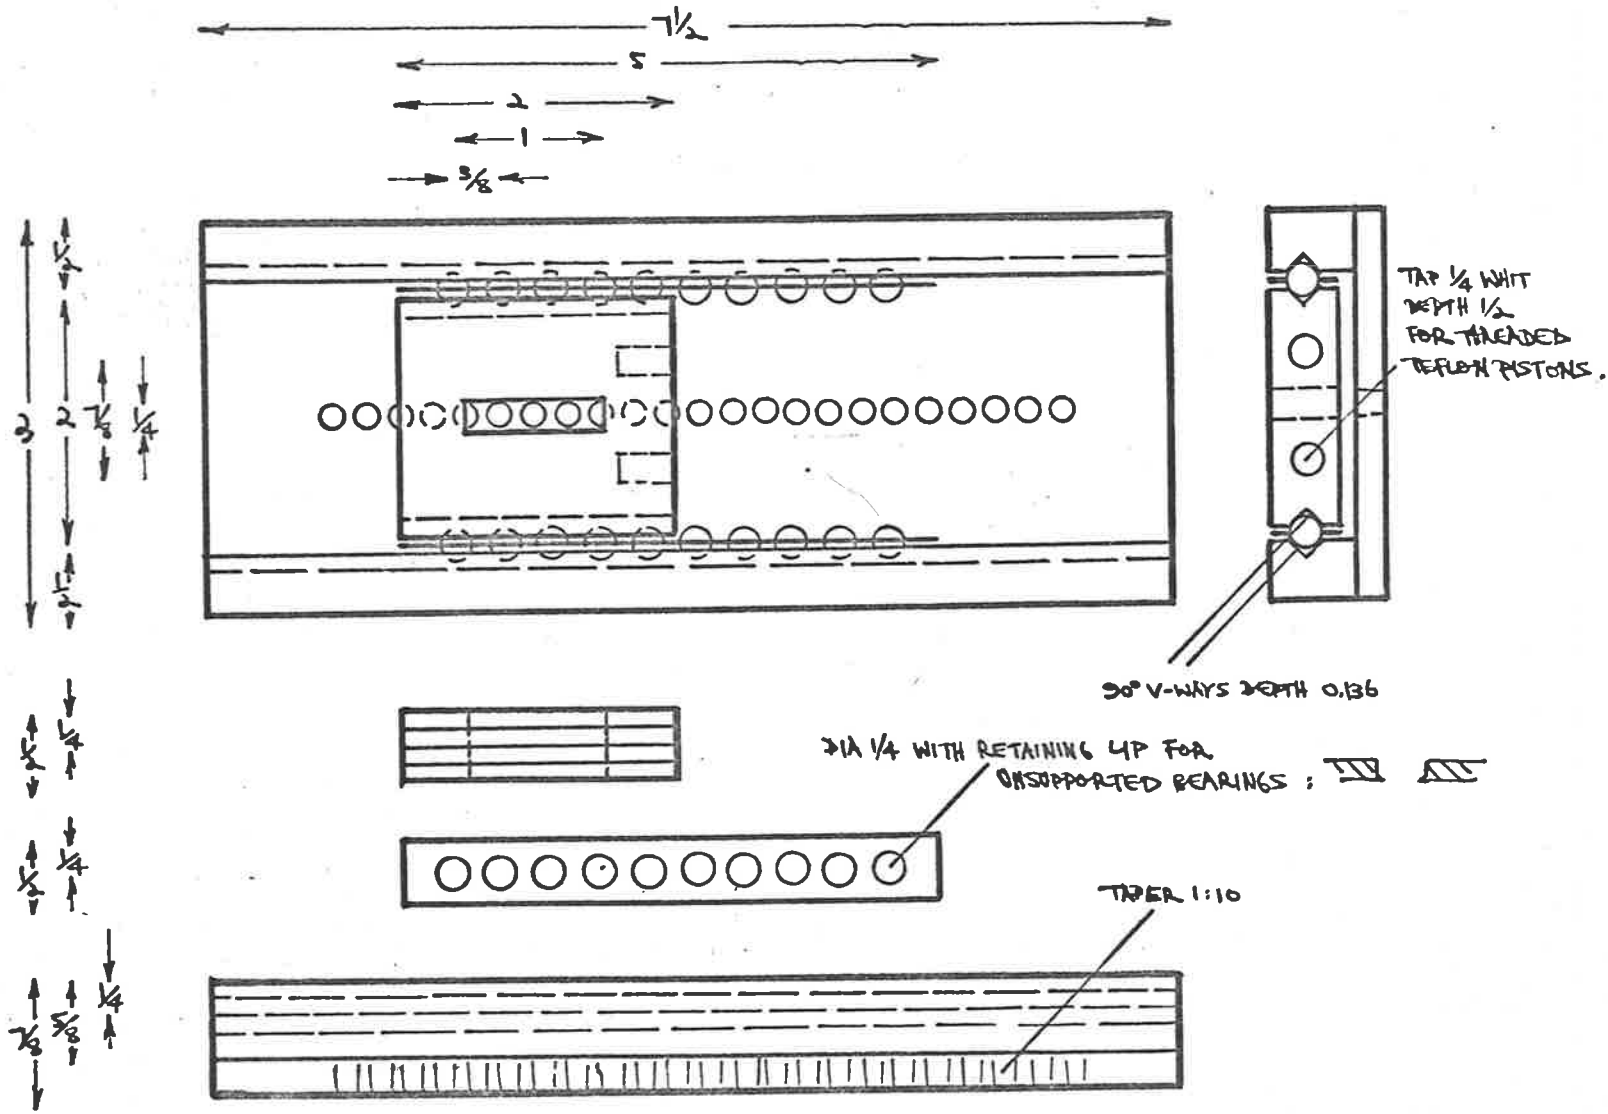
TROLLEY + TRACK ASSEMBLY.
